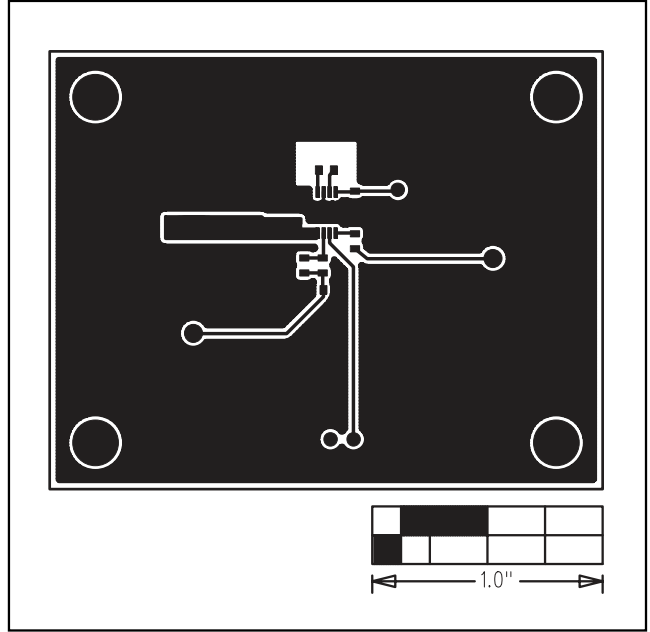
MAX9510 EV Kit PCB Layout—Component Side
